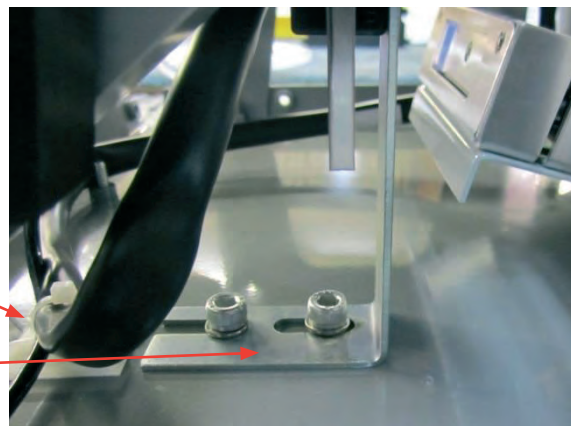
INSTALLATION OF THE PRESS ARM SWITCH ASSEMBLY
